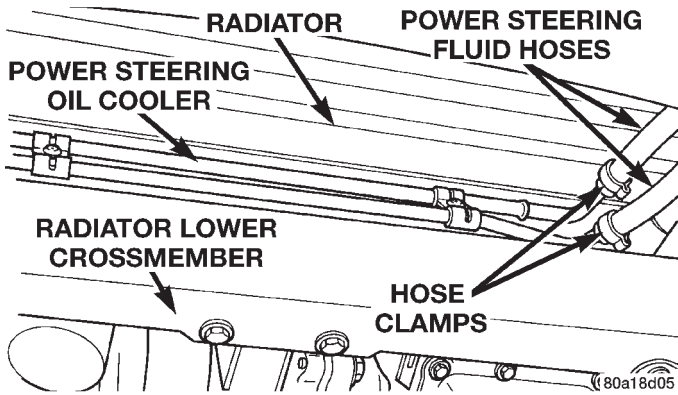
Hose Clamps At Power Steering Fluid Cooler
